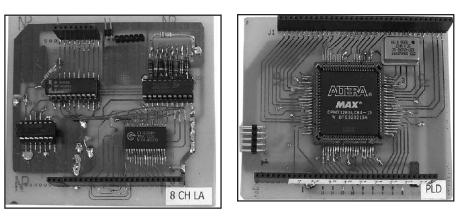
The 8-channel LA board and the PLD board. Notice the two board-stacking connectors on the PLD board.
